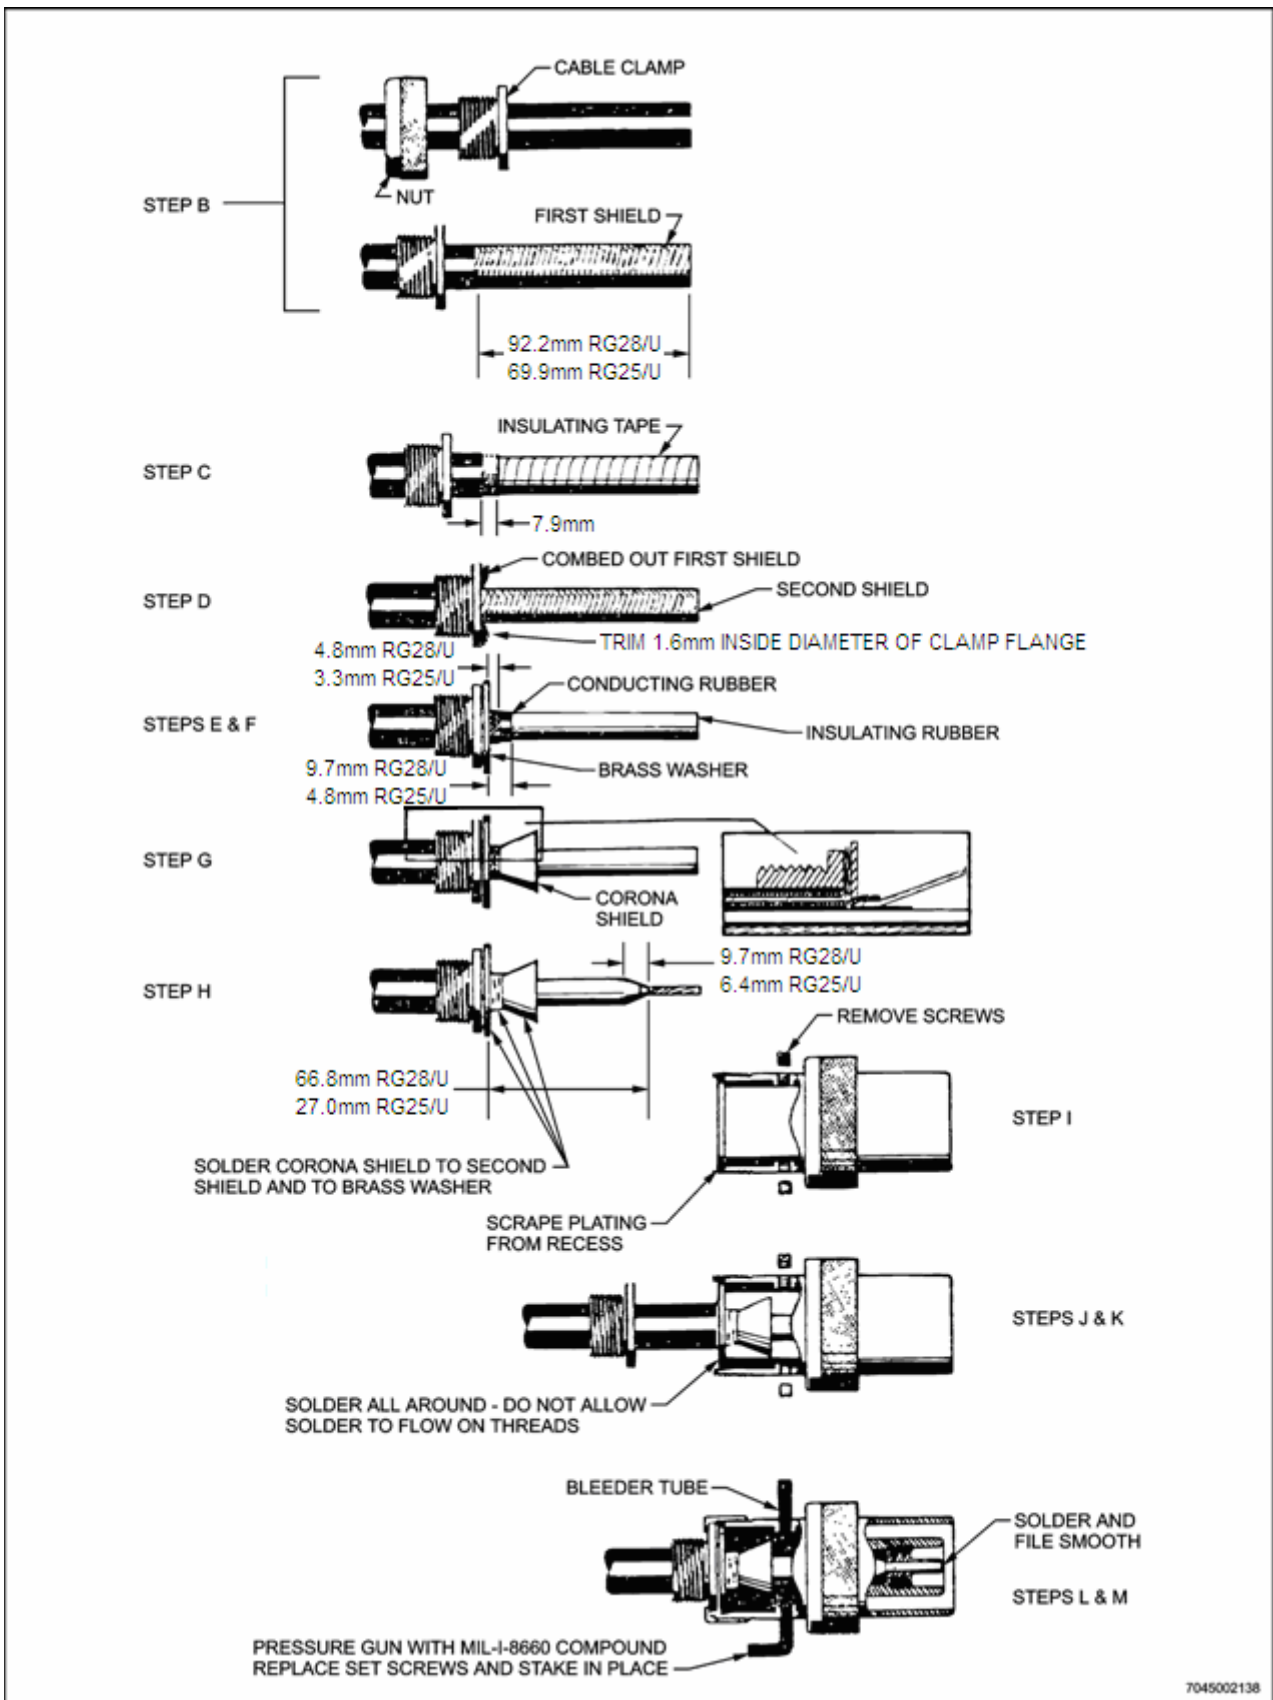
Assembly of Ceramic Insert Pulse Connector
